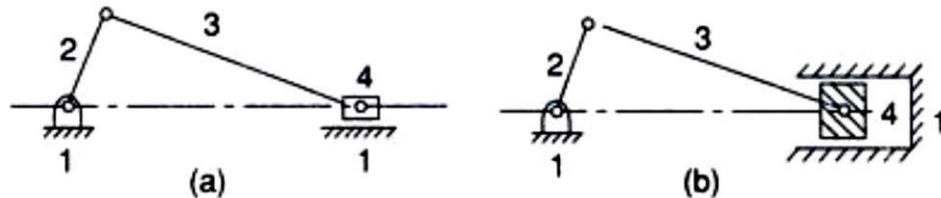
Mechanism used in (a) Reciprocating engine; (b) Reciprocating compressor
